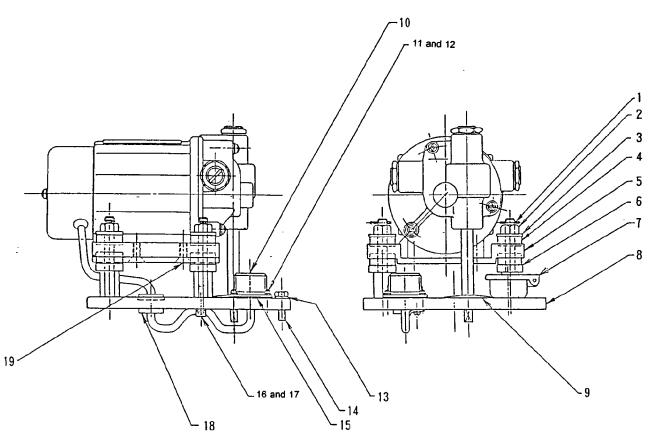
UG-8 Dial (5.7 or 12.8) Vibration-Resistant Motor Cover Assembly 90° Motor Mounting
